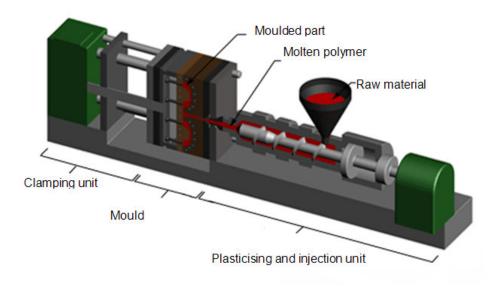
Schematic view of an injection moulding machine (CustomPartNet, 2007)
